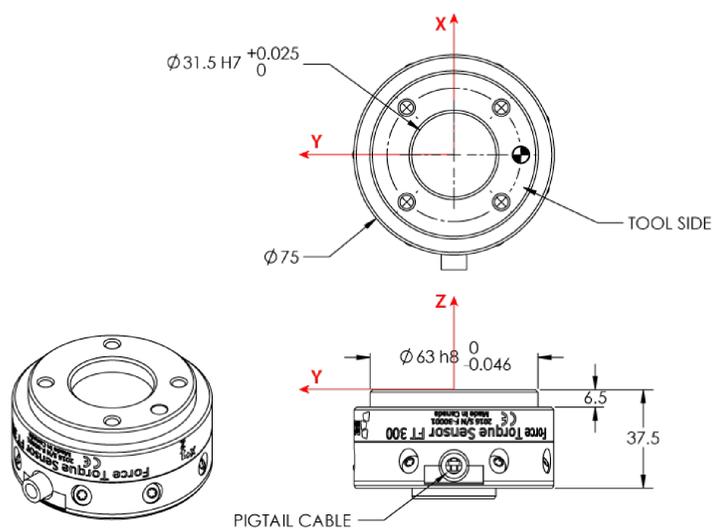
Robotiq FT 300 Sensor general technical dimensions.
